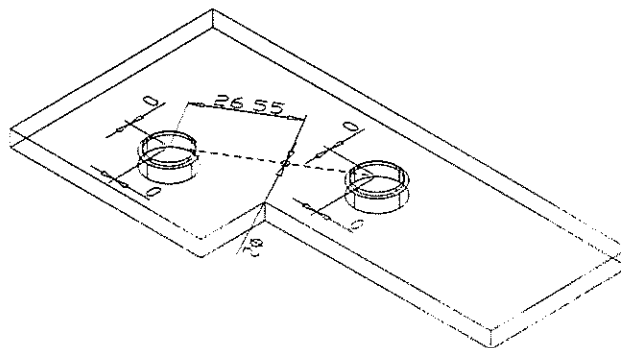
Circular profile extruded to cut the base solid, second circular profile constructed
